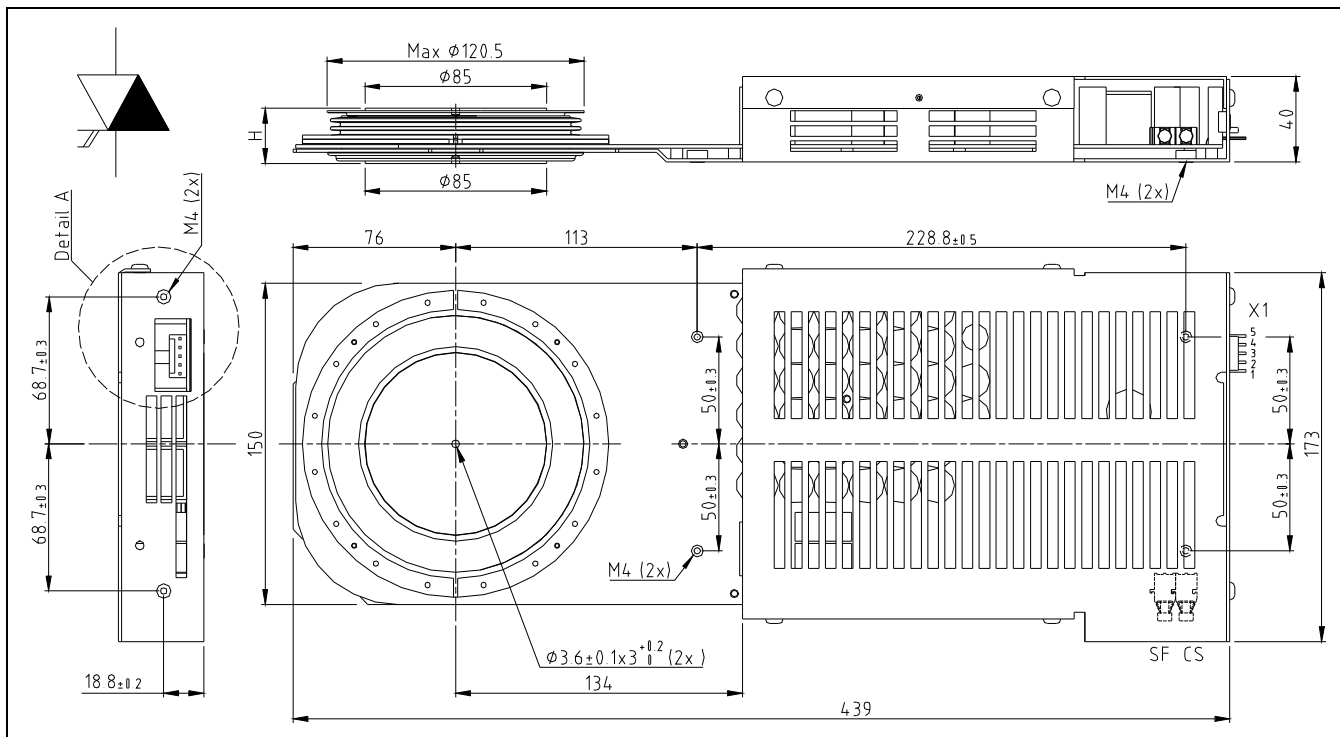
Outline drawing; all dimensions are in millimeters and represent nominal values unless stated otherwise
